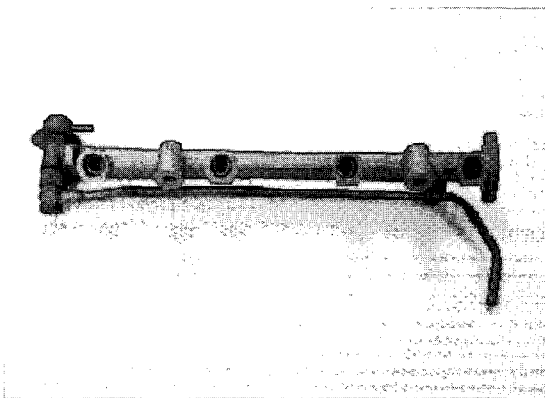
Photo of fuel rail trial part manufactured by squeeze casting process
